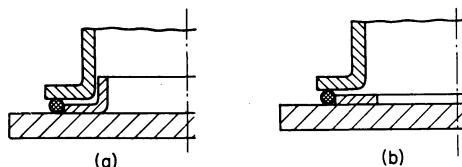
Bell jar seals with O-rings, using (a) retaining plate, (b) retaining ring. After Williams¹³¹⁸ (*Courtesy of The American Institute of Physics*)
